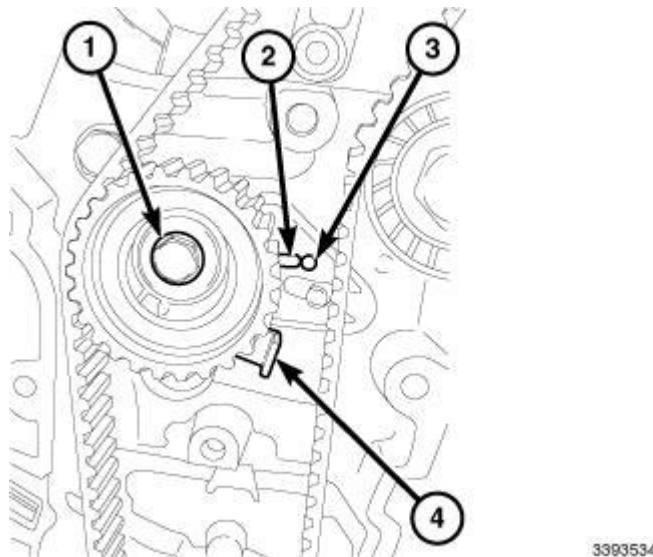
Bolt, Tensioner Arrow, Mark & Tensioner Tab
